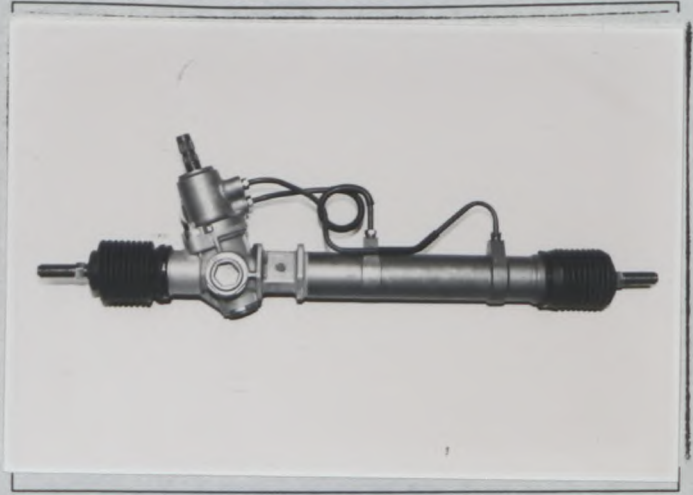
ALTERNATIVE STEERING RACK HOUSING
